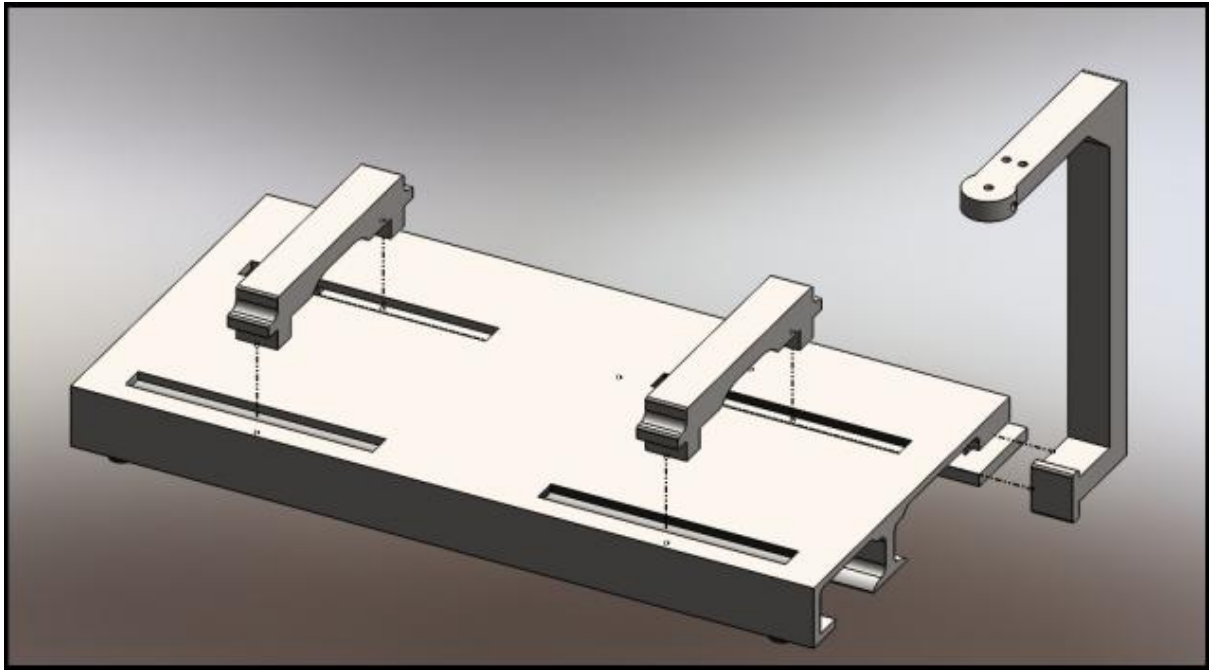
Exploded view of machine bed, cylinder head support and machine stand assembly
